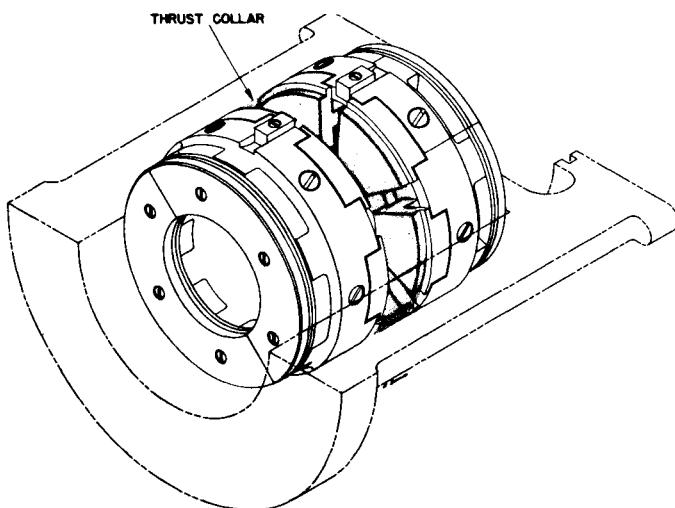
Double acting self-equalizing thrust bearing assembly (thrust collar removed) (Courtesy of Elliott Company)
